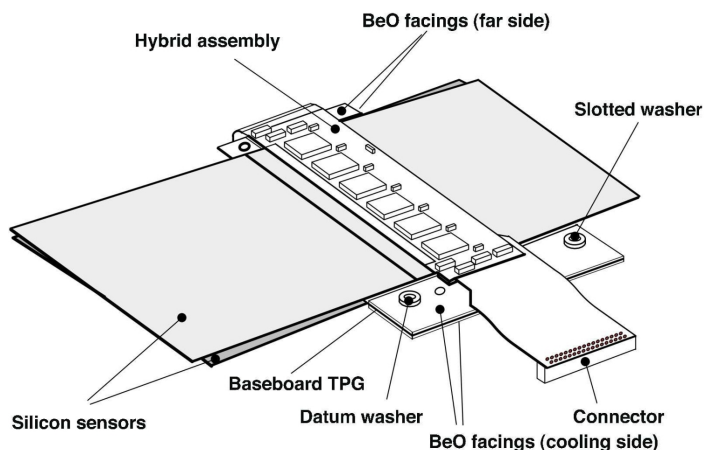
Schematic view of an SCT barrel module [117]. Two silicon strip sensors per side are wire-bonded to create 12 cm long strips. The hybrid assembly houses the read-out chips of the module.
